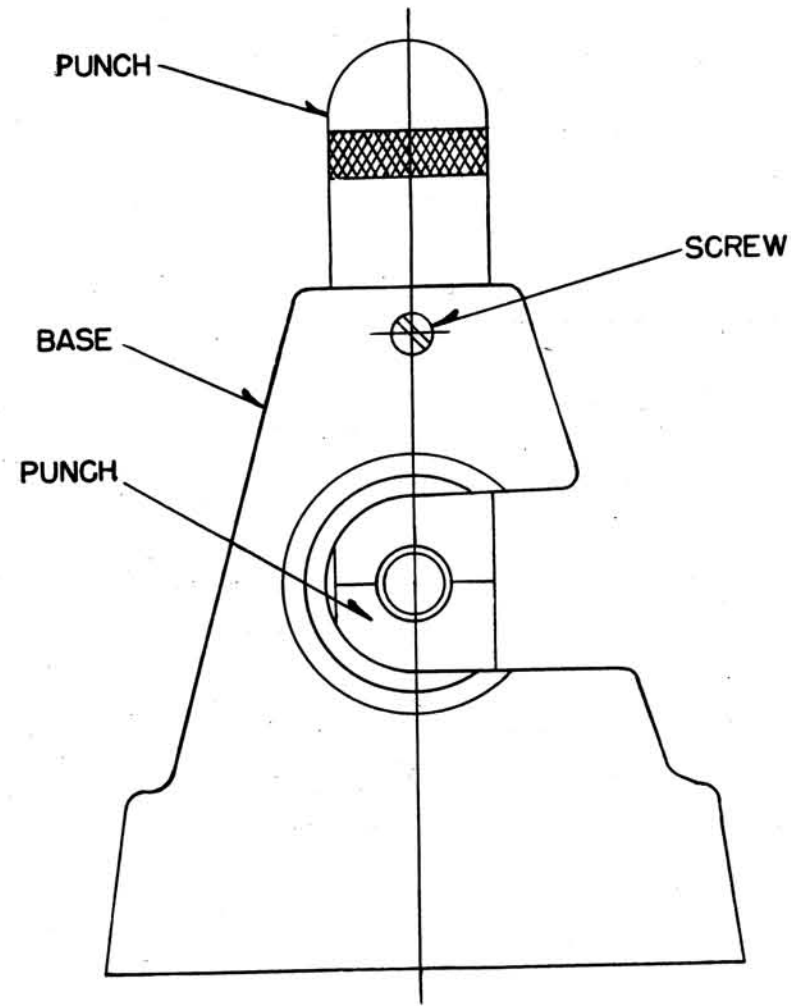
A—Typical Handtool for Attaching Casing Ferrule
